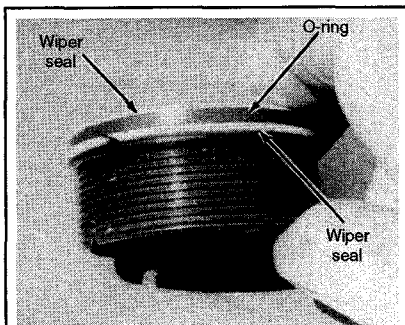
Trim cap with the O-ring and the two wiper seals properly installed.
